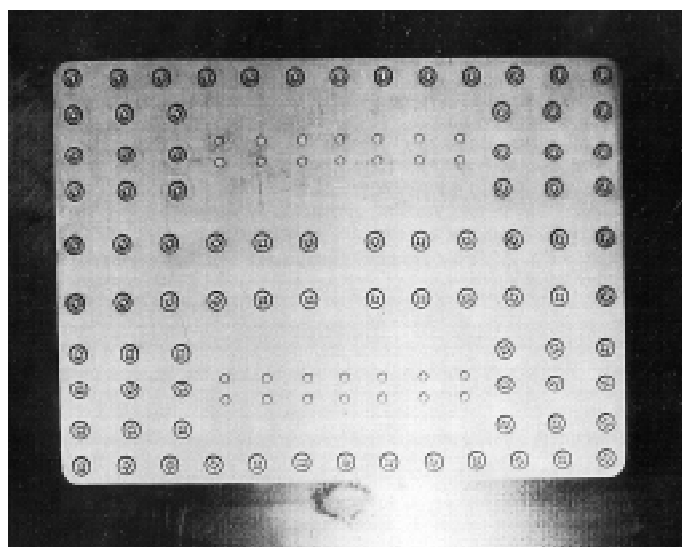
Typical Bolted Repair on CFRP Skin Panel Test, Exterior View
